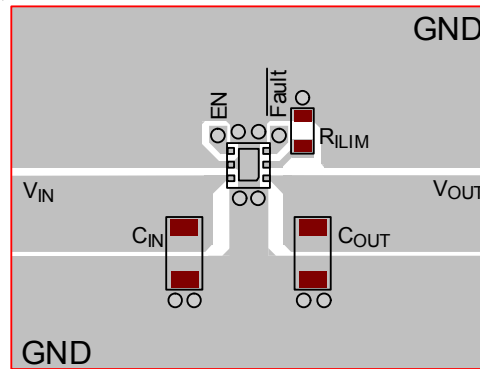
PCB Layout Guide for WDFN-6SL 2x2
